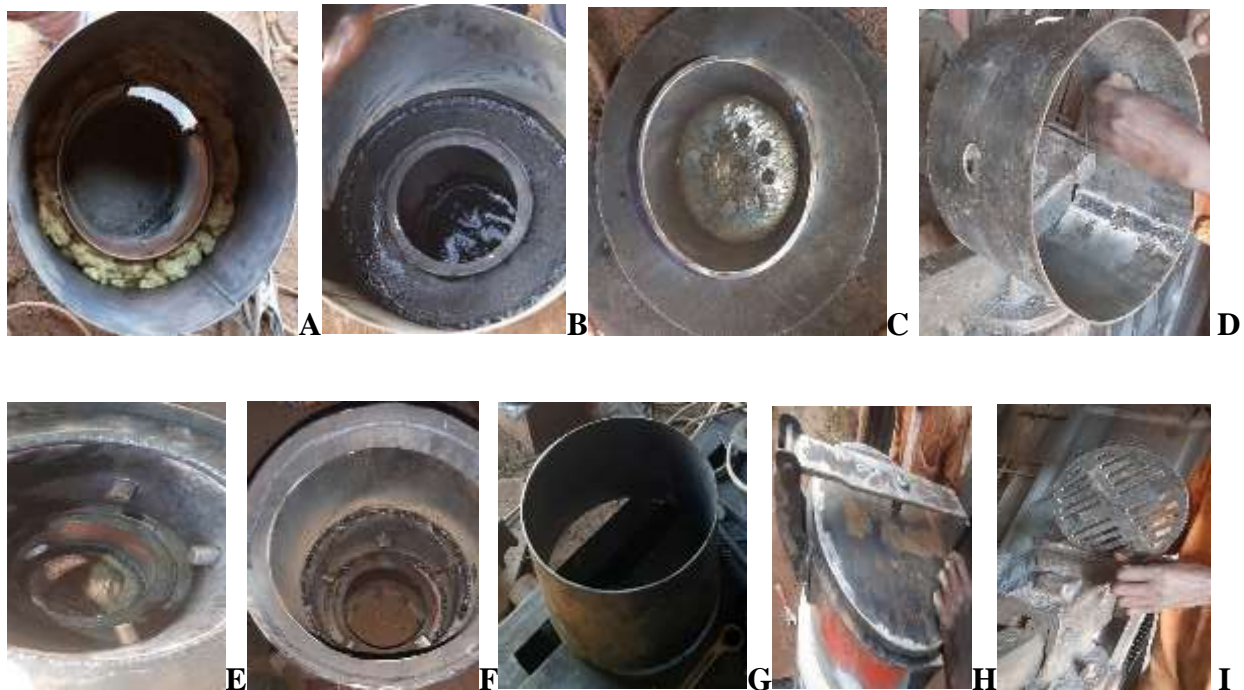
Components of the gasifier: Gasifier internal shell (A), choke mantle(B), choke plate (C), air jacket (D&E), pyrolysis ring (F), condensate liner(G), gasifier cover and grate assembly (I).
